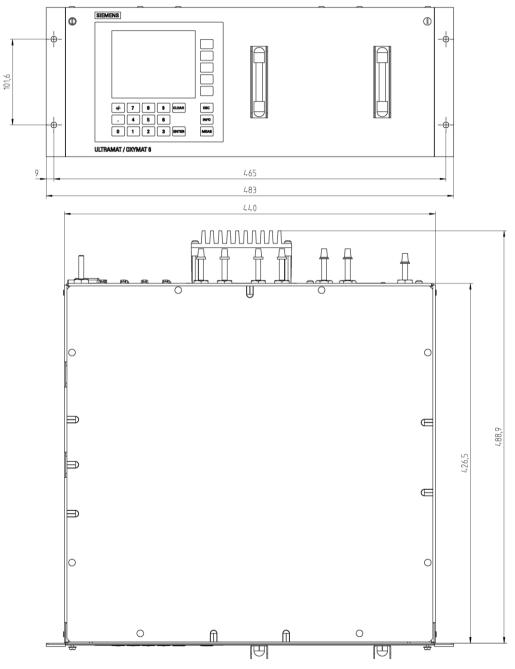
OXYMAT 6E, dimension drawing: Side view and rear of the device
